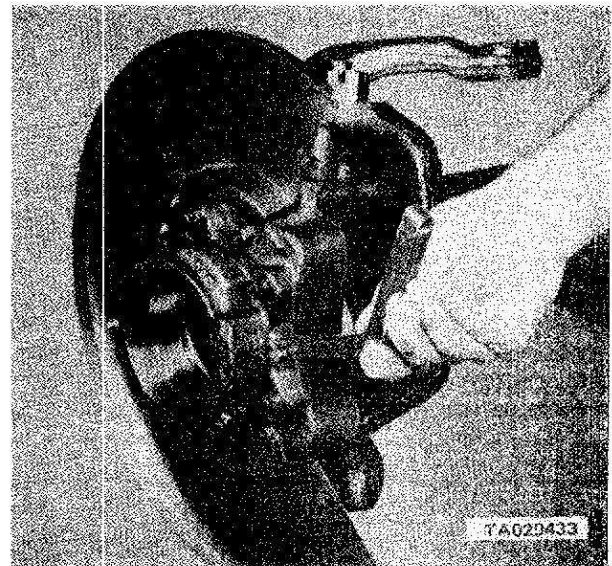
Checking Knuckle-to-Retainer Clearance.
